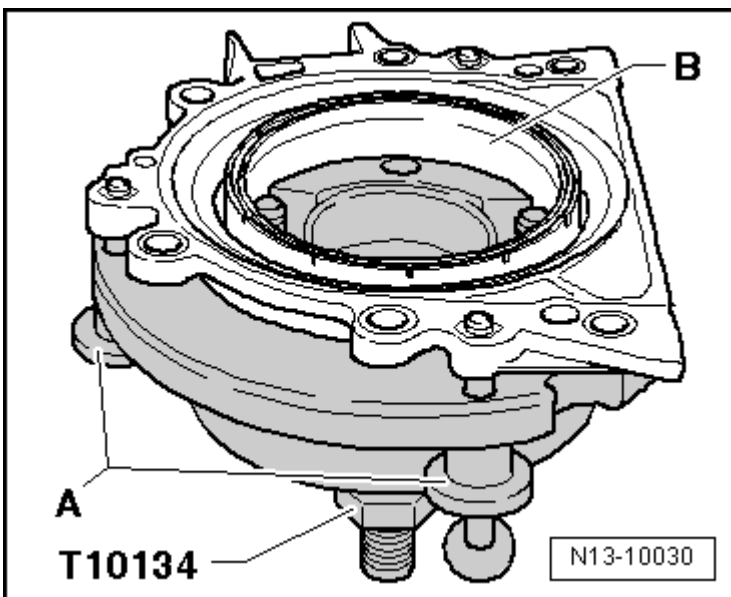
Identifying Sealing Flange And Sealing Lip Support Ring Pressed Onto Surface Of Assembly Tool T10134 So Locating Pin Can No Longer Slip Out Of Bore Of Sensor Wheel
